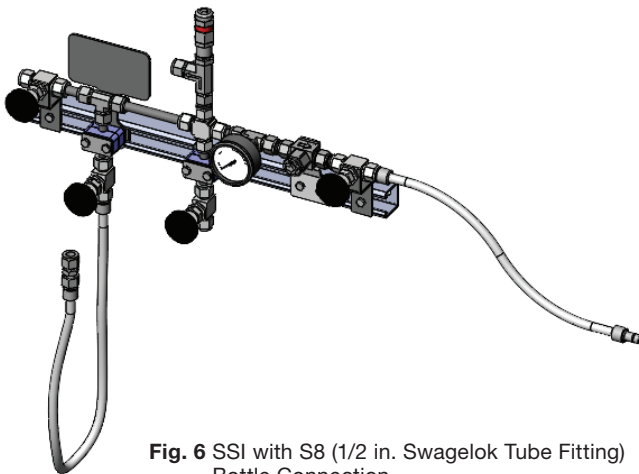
SSI with S8 (1/2 in. Swagelok Tube Fitting) Bottle Connection
